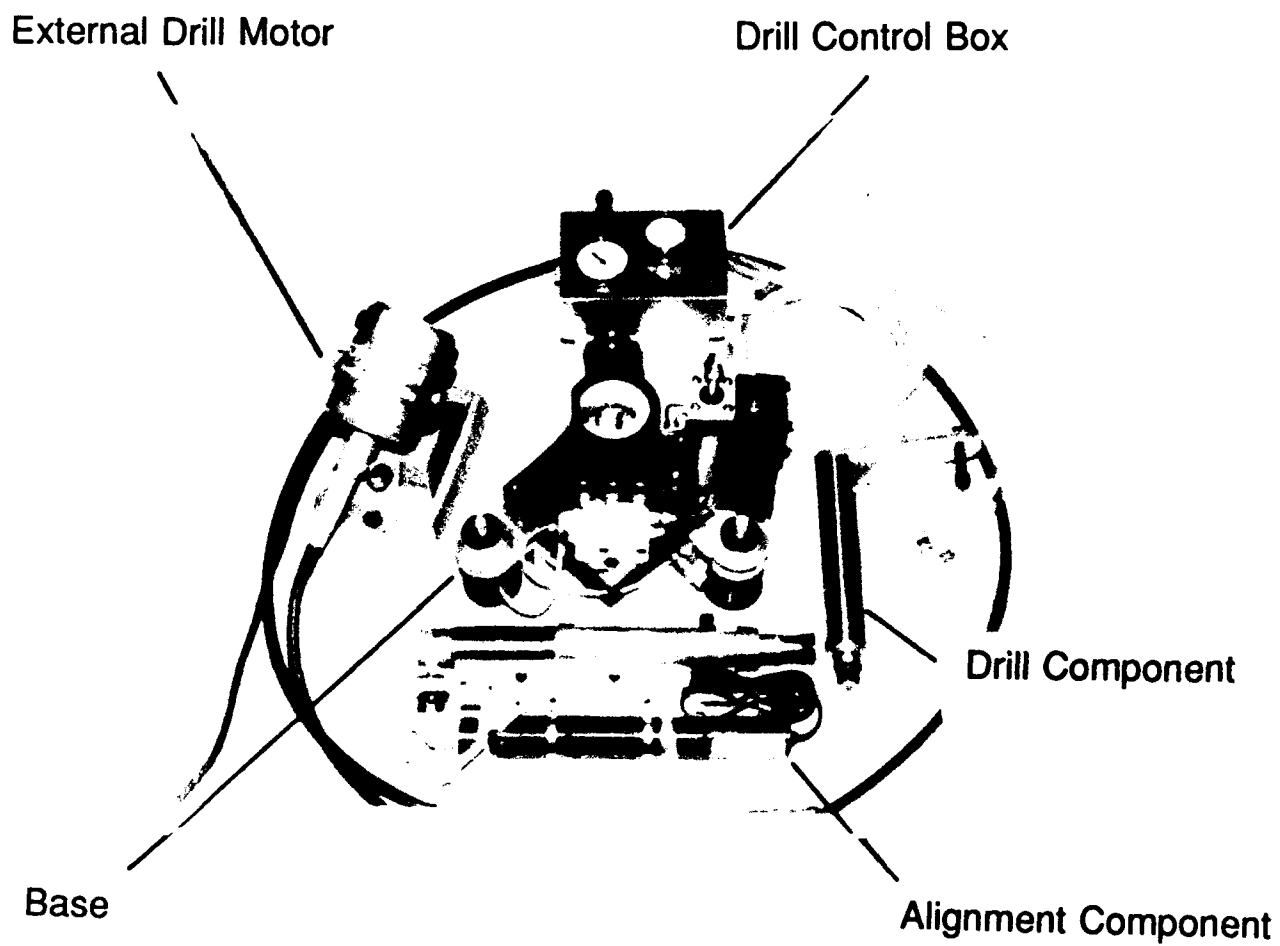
Vacuum Attached Laser Aligned Portable Drilling Device.
